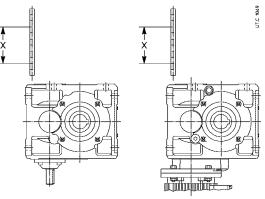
Position the bevel helical gear reducer or gearmotor, mounting position B7 for oil level (quantity) measurement.
